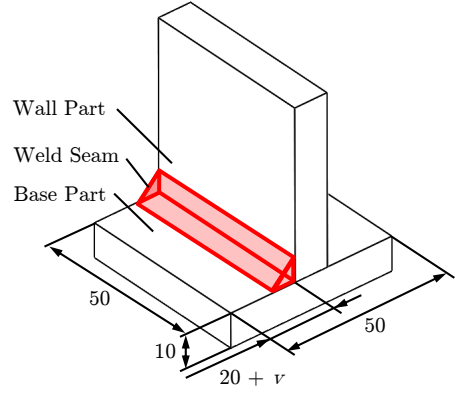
Welding assembly consisting of base and wall part with identical dimensions and assembly variation v .
